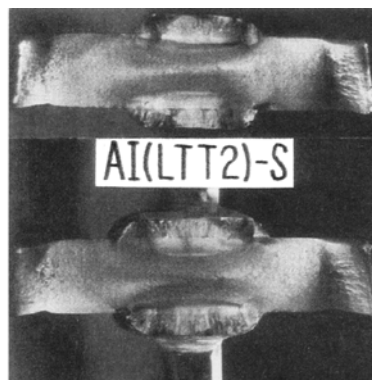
Fracture surface after fatigue test (Type AI,  $150 \text{ N/mm}^2$ ,  $3.50 \times 10^5$  cycles)
